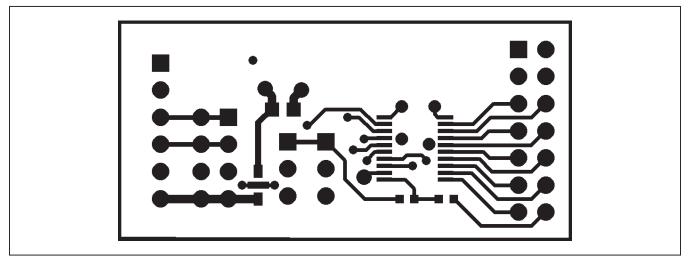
MAX5825PMB11 Peripheral Module PCB Layout—Component Side
